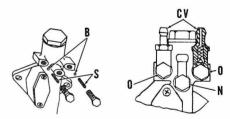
All pumps should be equipped with brass outlet check valve connectors (CV). Old style check valves (B & S) should be discarded. Inlet connector (N) must NOT have check valve.
